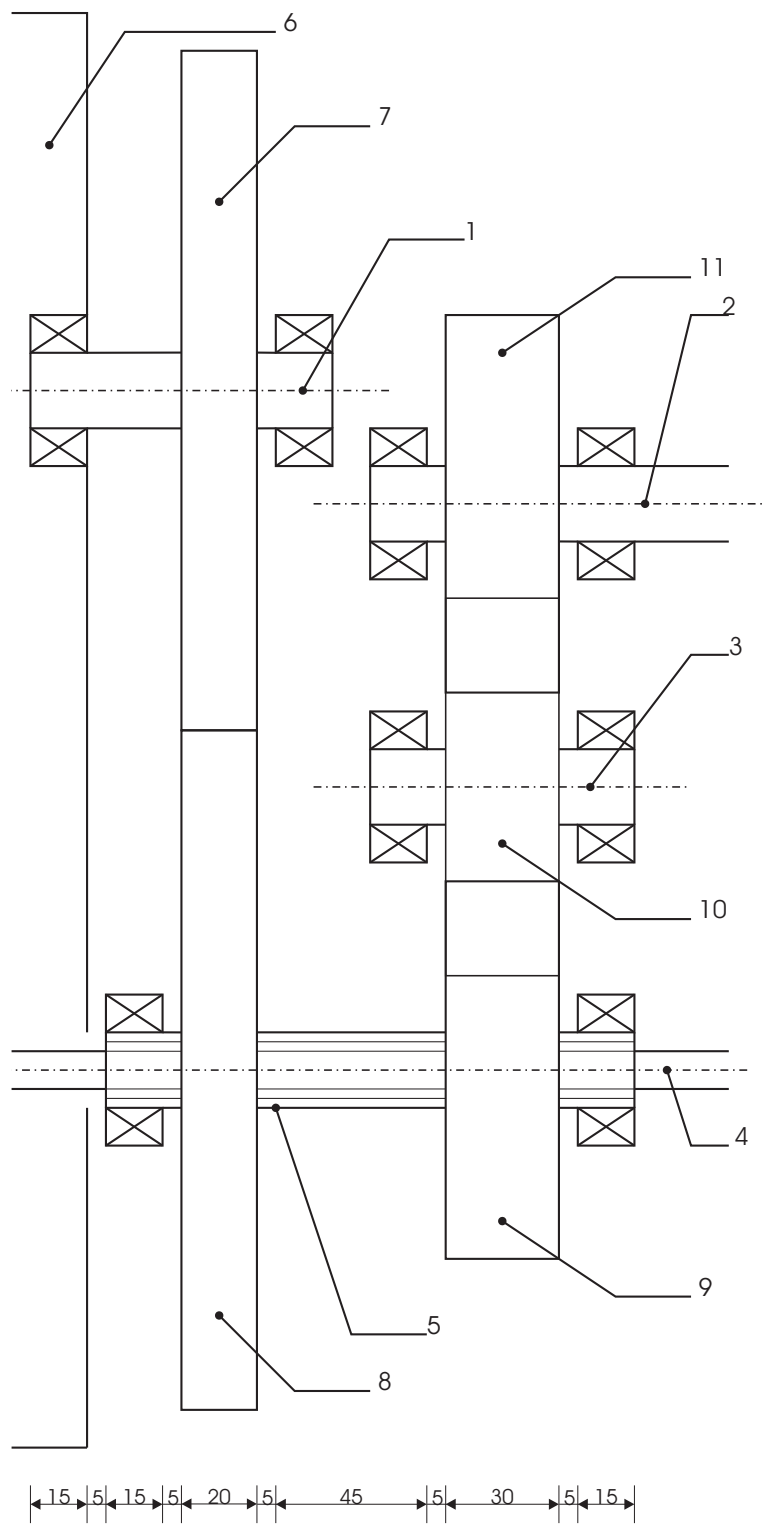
An intersection of the gears, shaft and bearings of the PLTM drive
